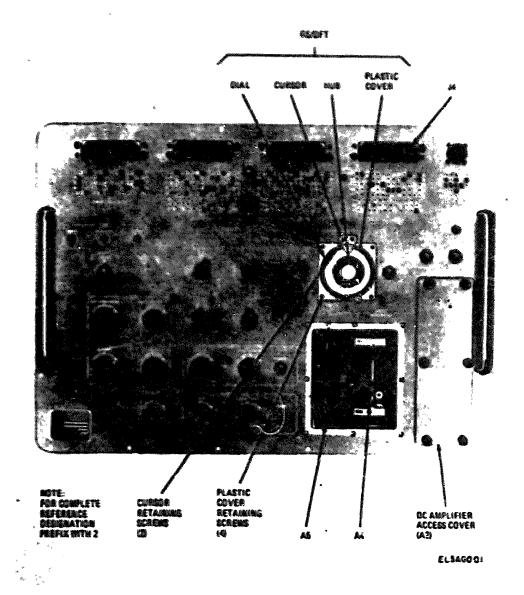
Test Set Subassembly MX-8632A/APS-94D, Unit 2, front panel, parts location.
